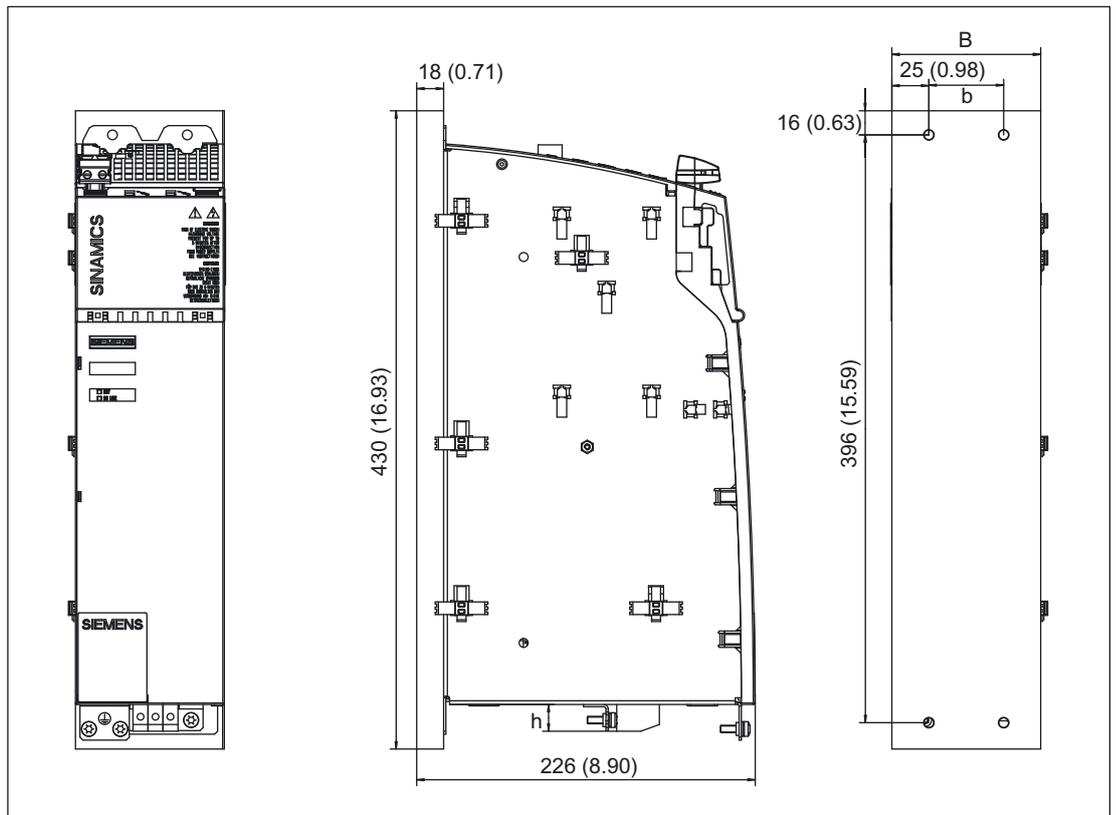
Dimension drawing, Active Line Module with cold plate (16 kW)
